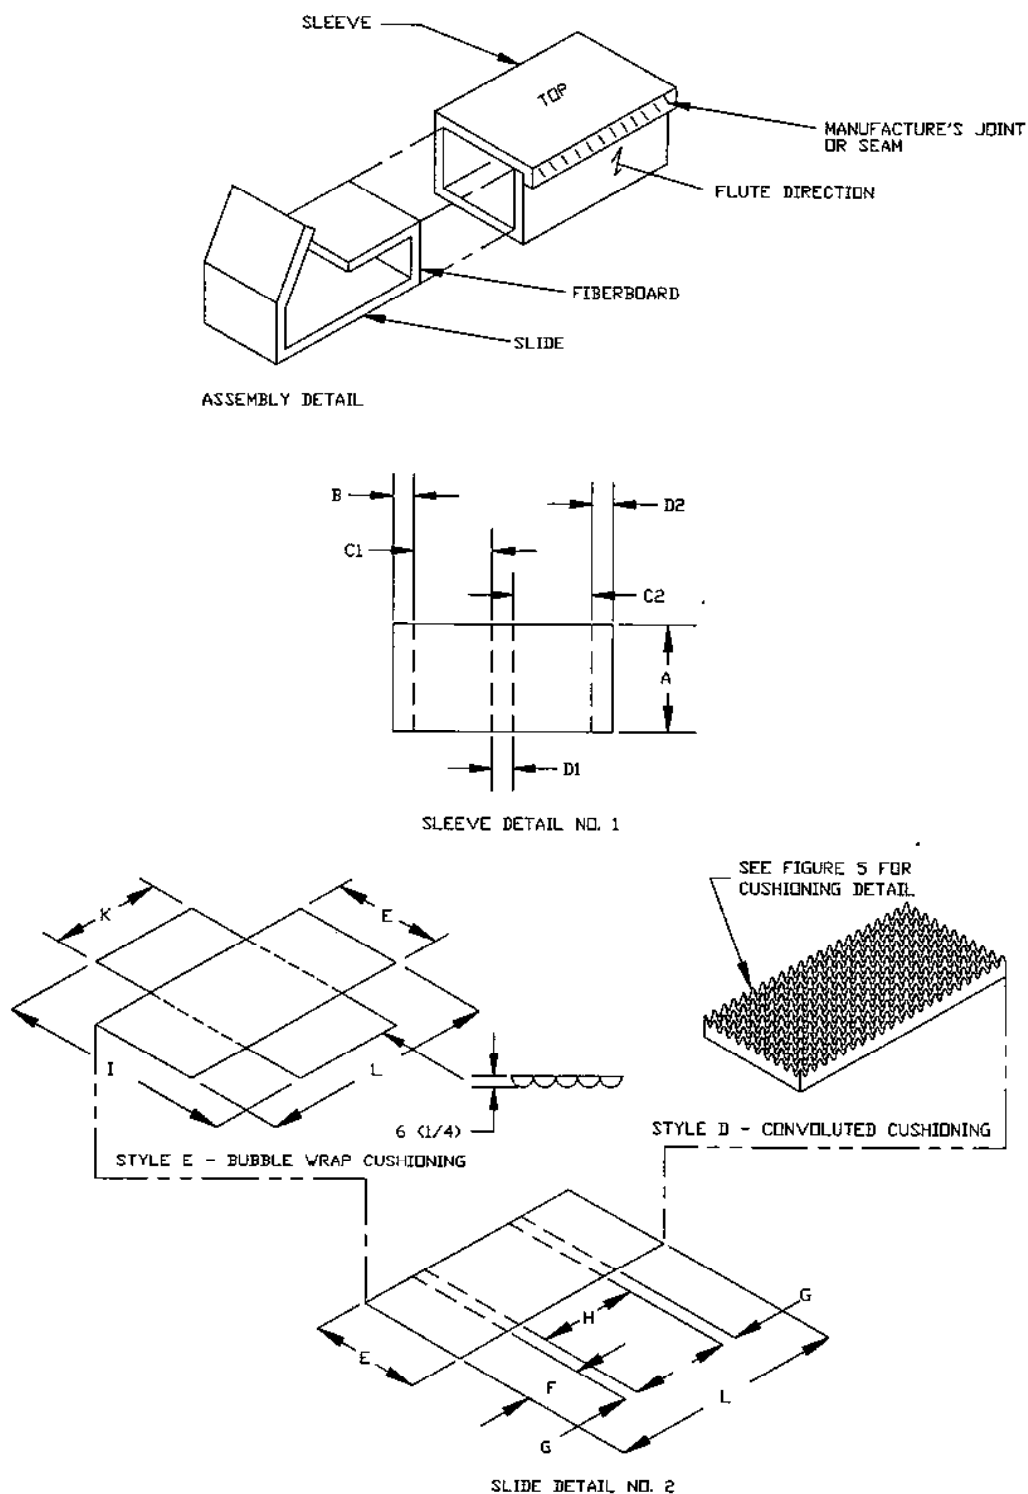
Type II, folding cushioning container, style D (see table I for dimensions); style E (see table II for dimensions)
